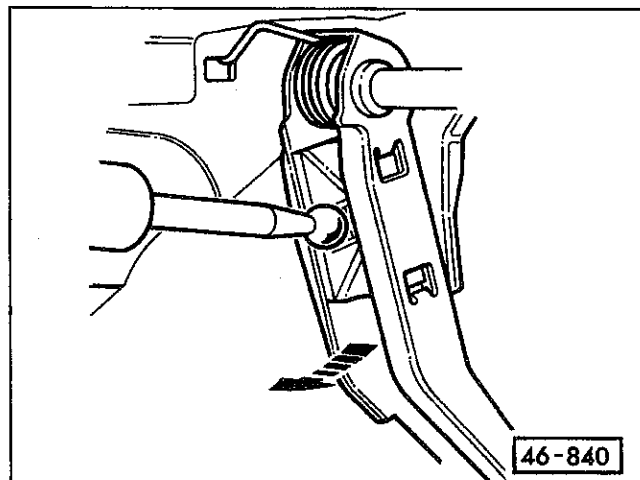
Brake pedal being installed to vacuum booster pushrod. Pedal should engage pushrod with an audible click.
